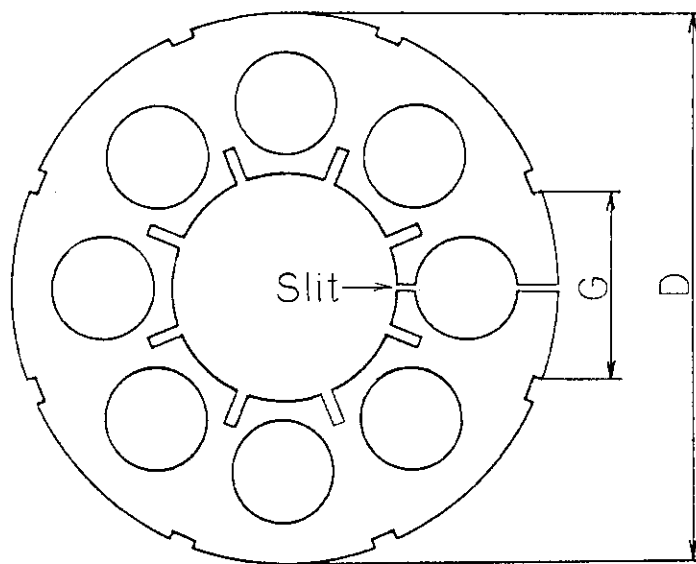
Dimensional change measurements of graphite blocks slices cutted from the fuel test element of Peach Bottom reflector
